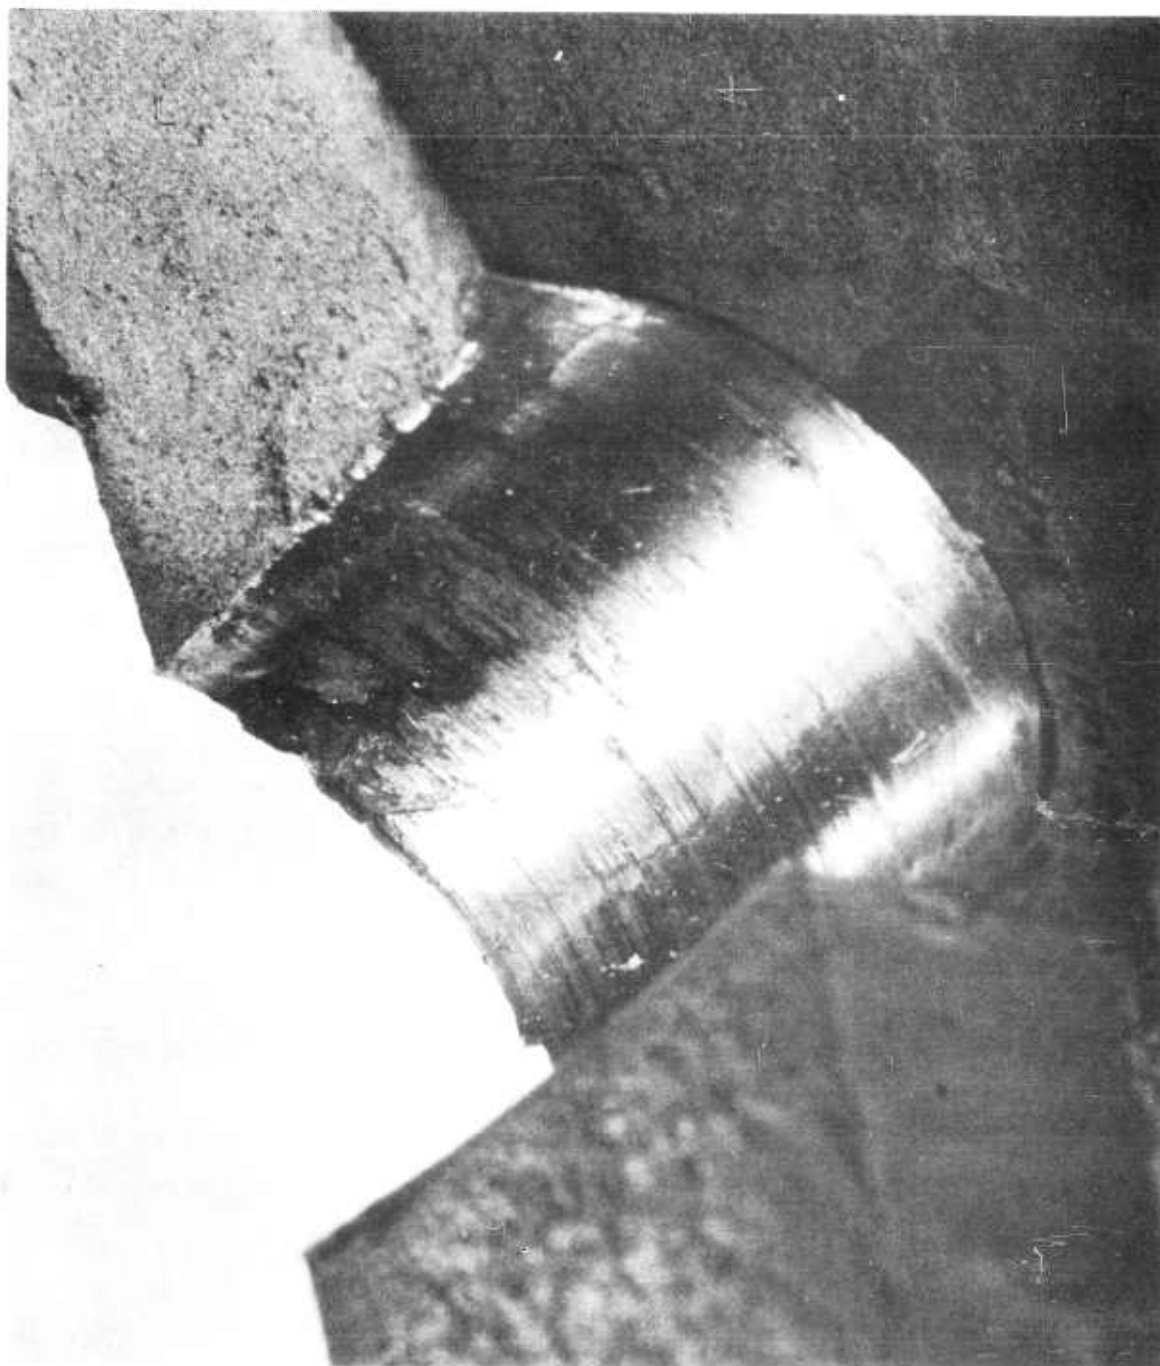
Rear Spar Fracture Area -- View of Crack in Burr
